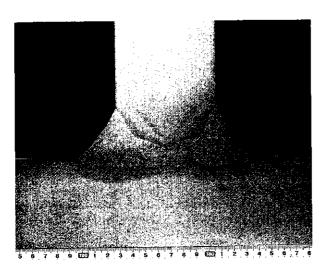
Macro section of full penetration fillet welded joint with 80-mm-thick web
